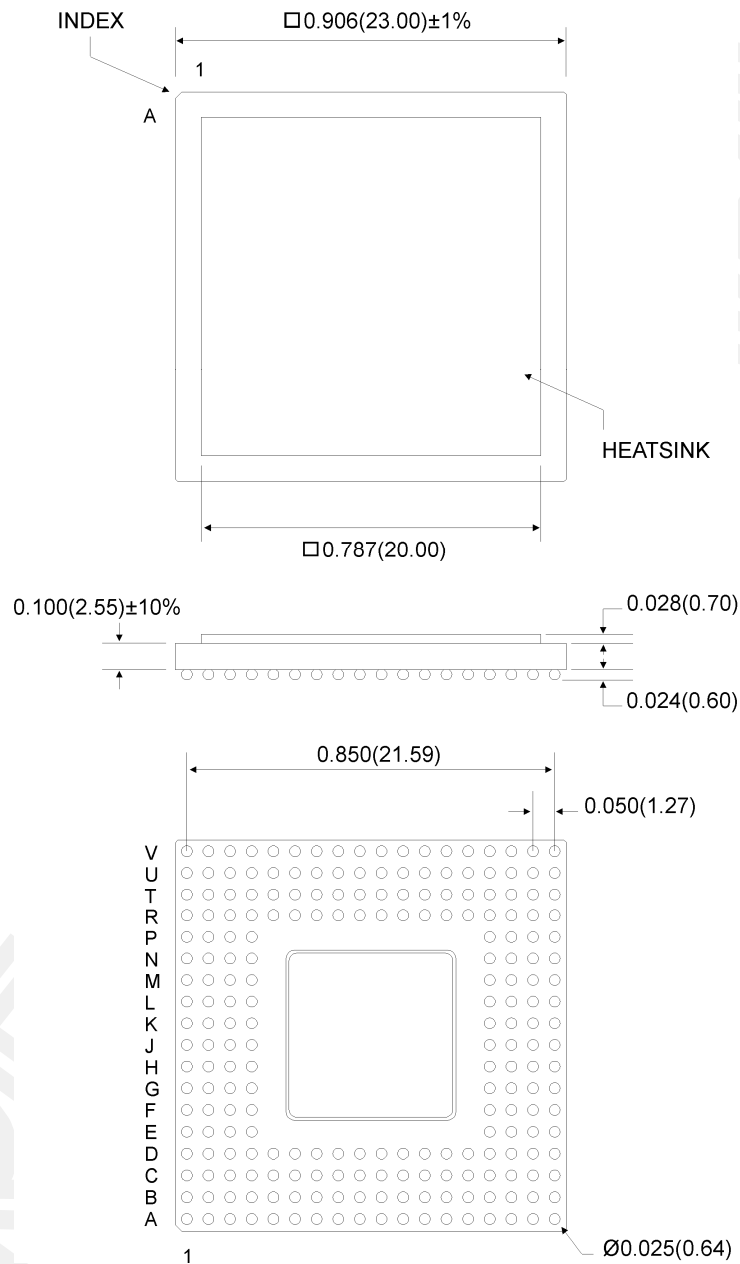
RDX004M4-BG package, dimensions shown in inches (mm).
